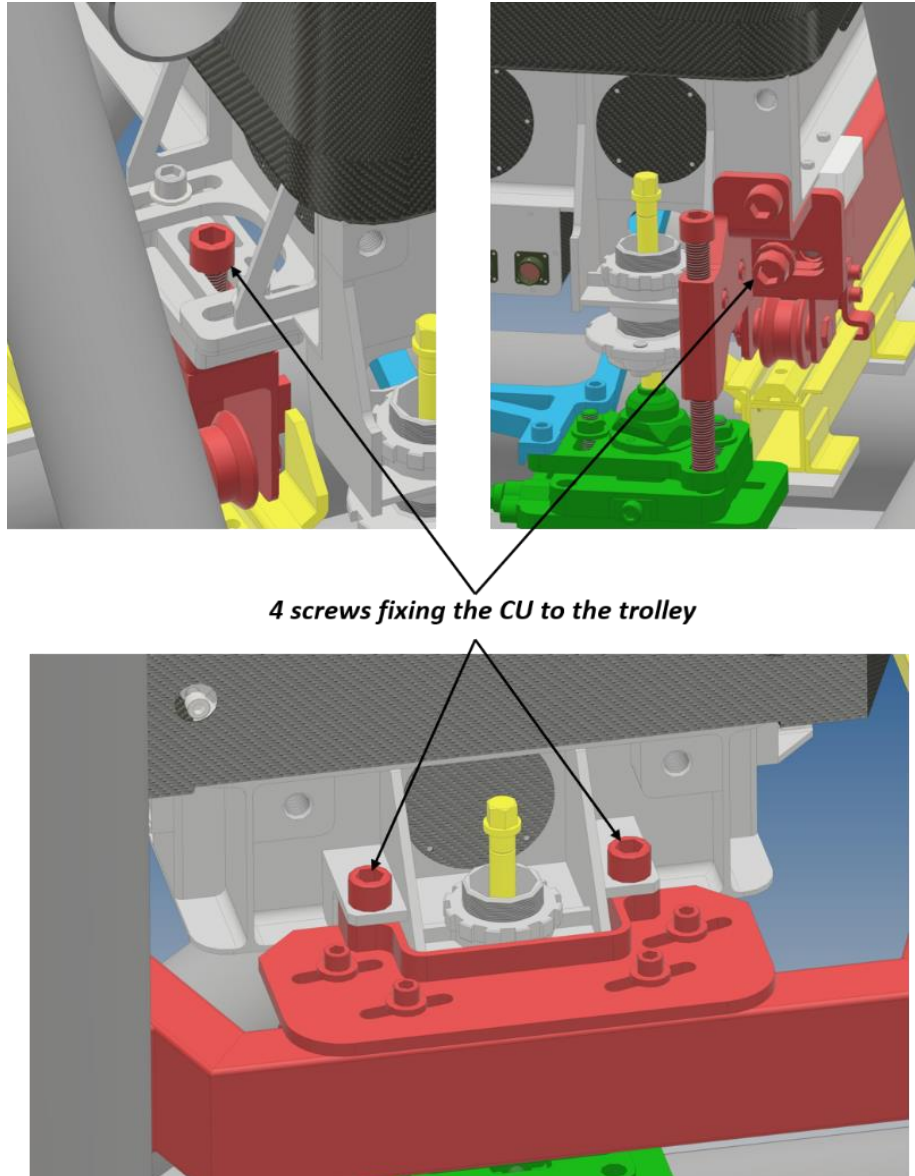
the 4 M20 fixing screws to be removed to free the trolley
